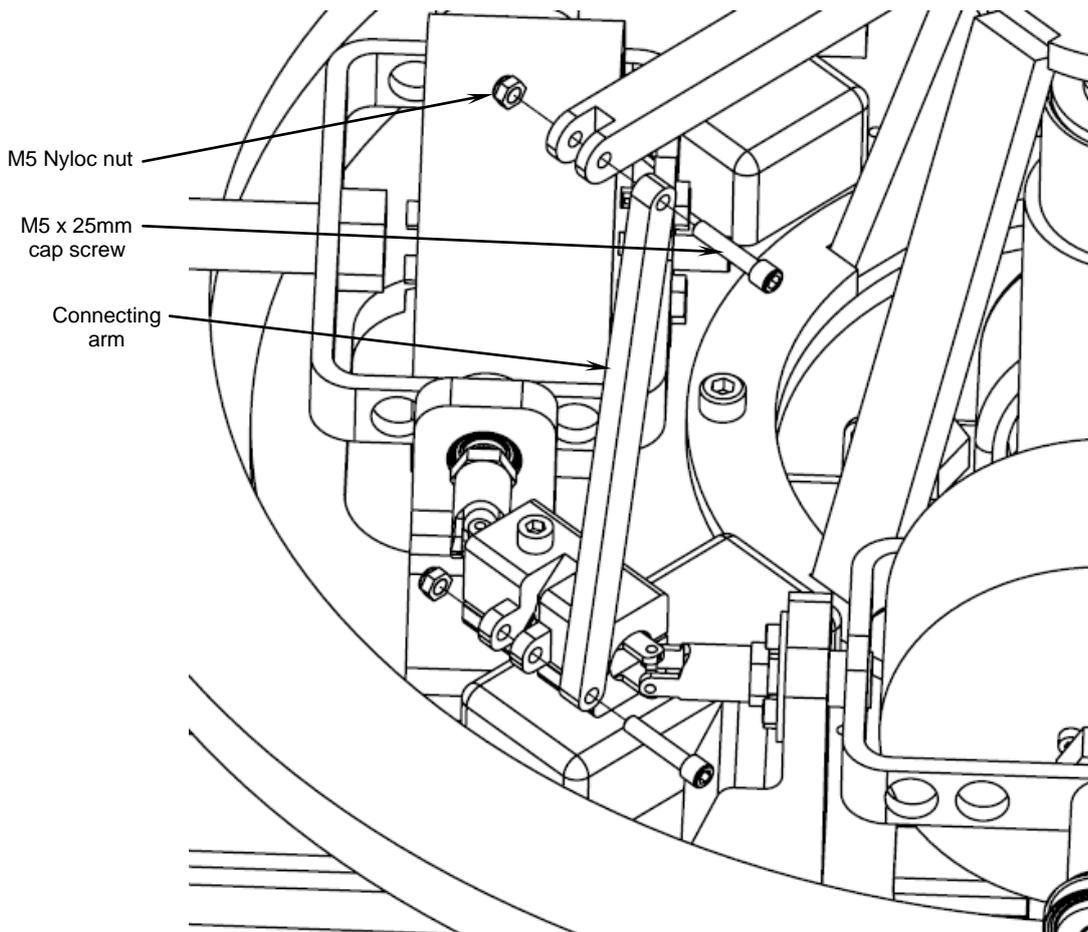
Attaching connecting arms to clamping coupling and overhead linear slide
